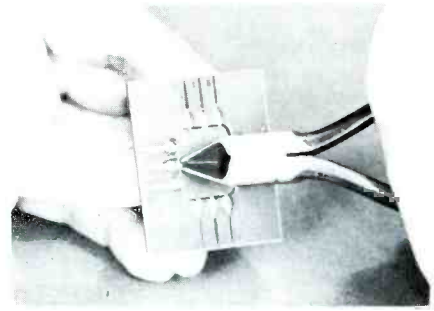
Cutting Risers on Module Which Does Not Have Tube Socket.
